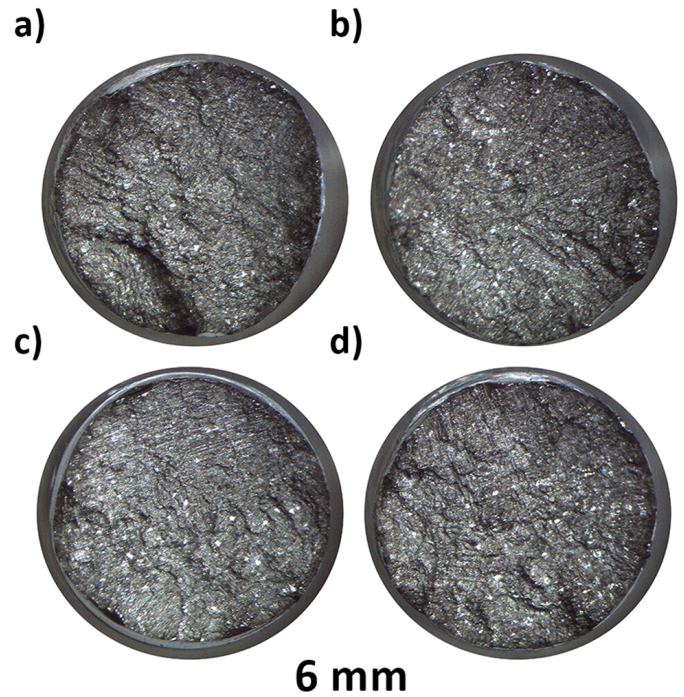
Fractures of tensile test specimens: a) N1; b) M1; c) N2; d) M2
